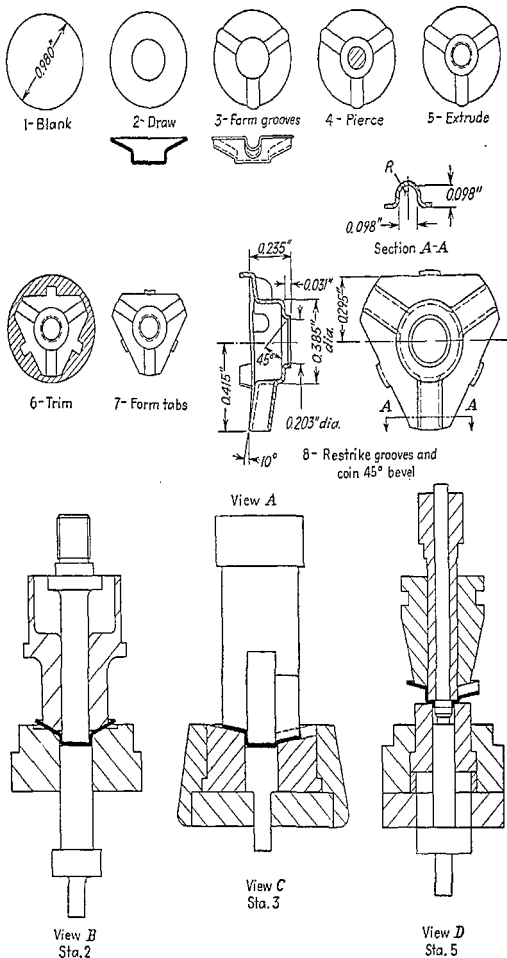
Eyelet machine fabrication of an aluminum part: view A, part development; views B, C, D die details. (Brighton Division, Advance Stamping Co.)
